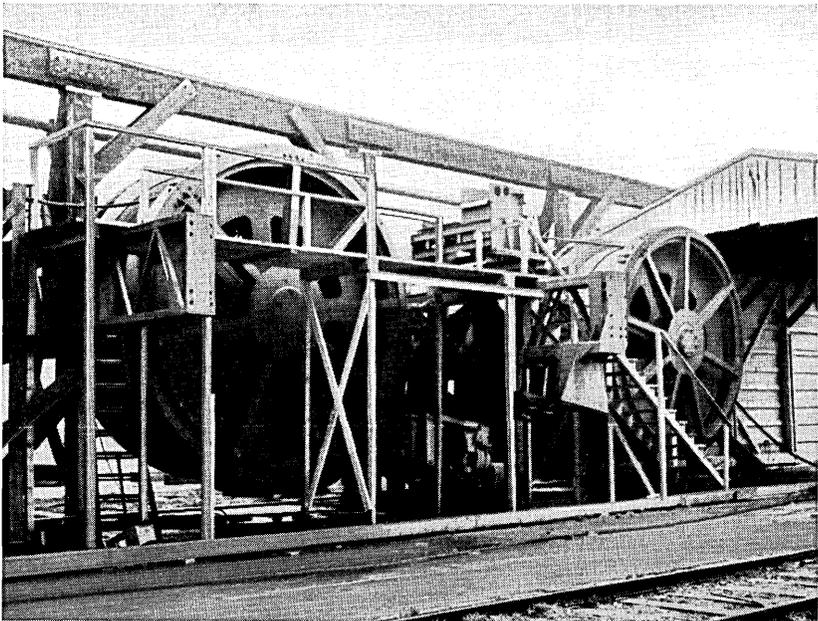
Cable engine drums set up for manufacturer's tests.
